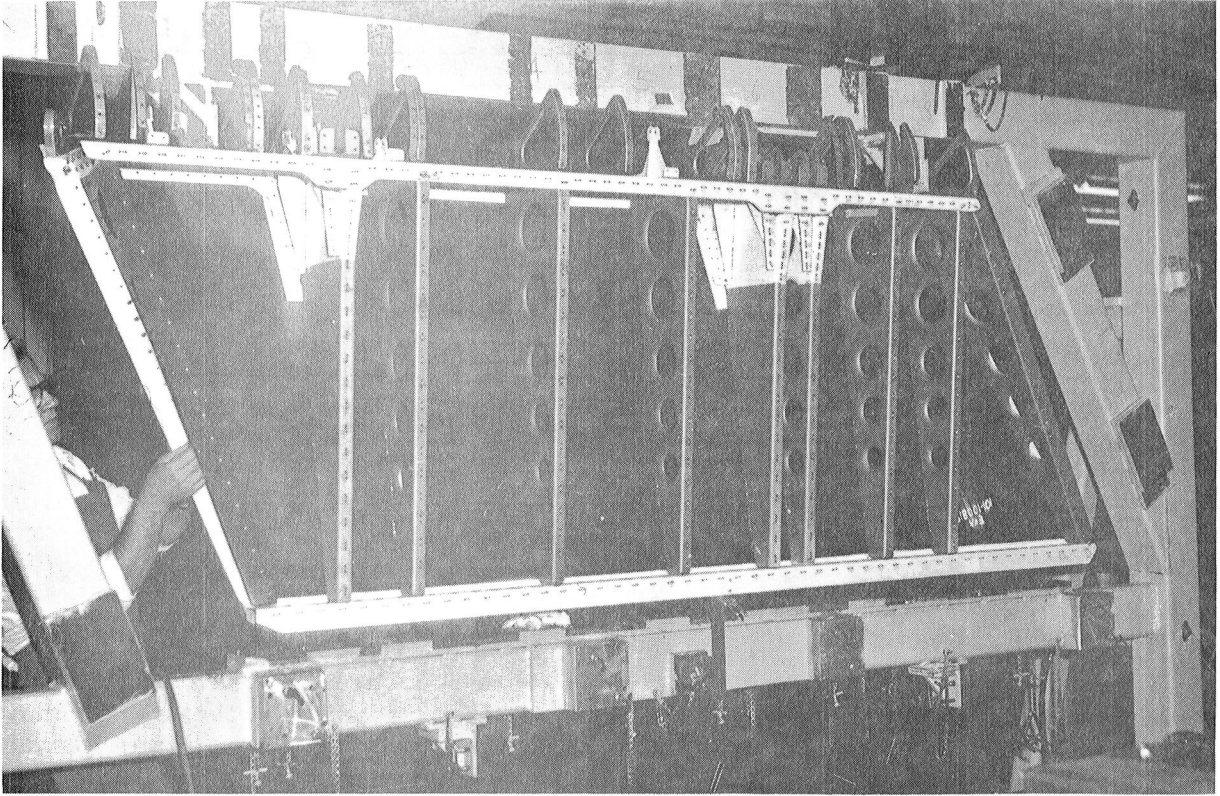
Installing Upper Cover in Final Assembly Fixture
